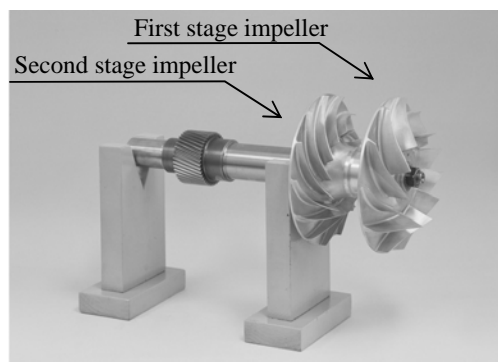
Impeller and shaft assembly (The first and second impellers are installed on the compressor shaft)
